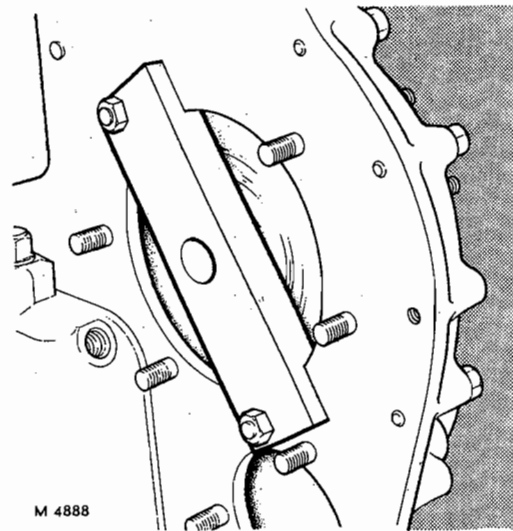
CENTRALISING COMPRESSOR DRIVE GEAR
